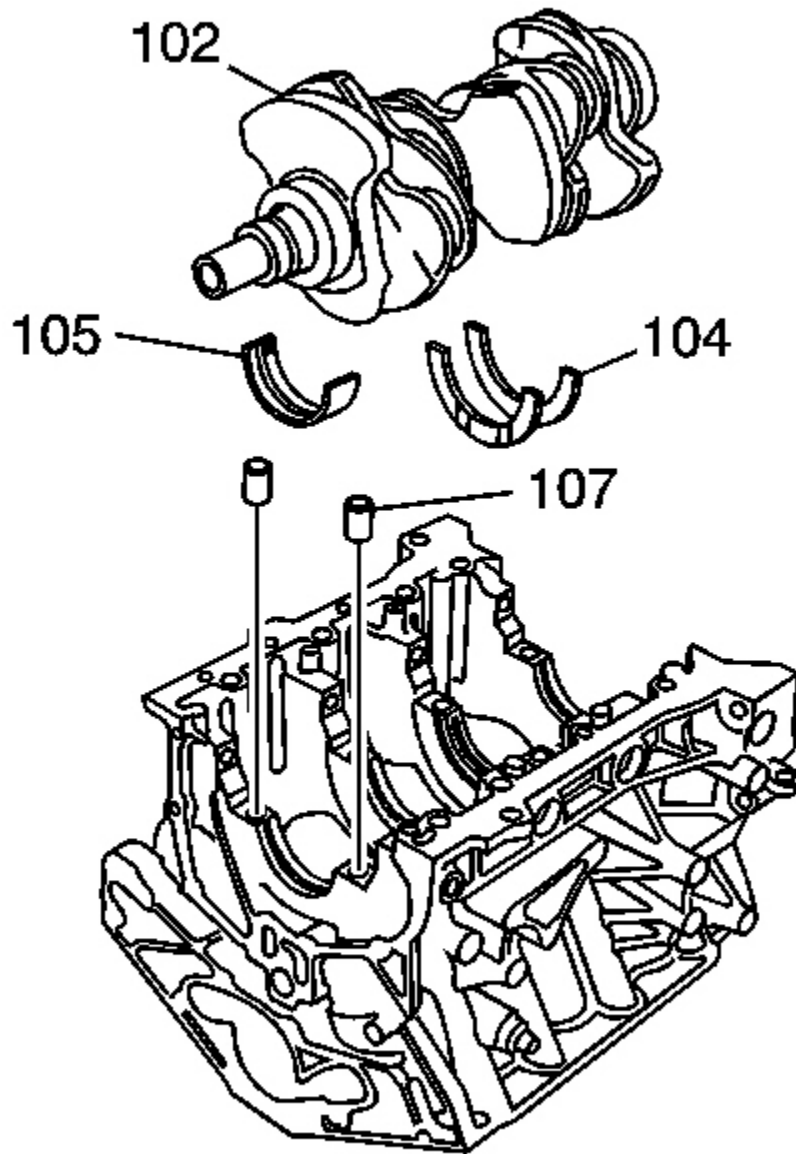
View Of Crankshaft, Upper Bearings, Thrust Bearings & Pins
